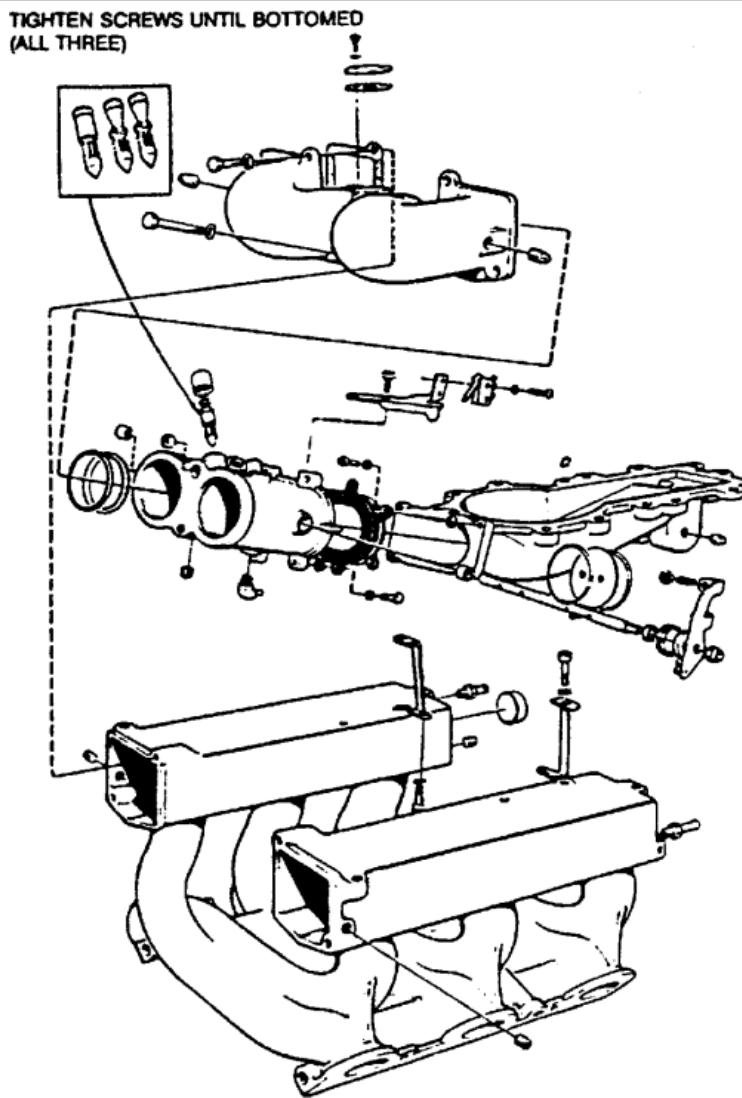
Intake manifold assembly-2.8L 6-cylinder
